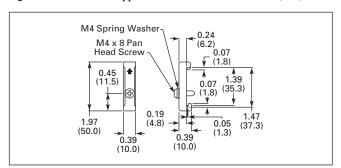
PFP-M DIN Rail End Stop — Approximate Dimensions in Inches (mm)
